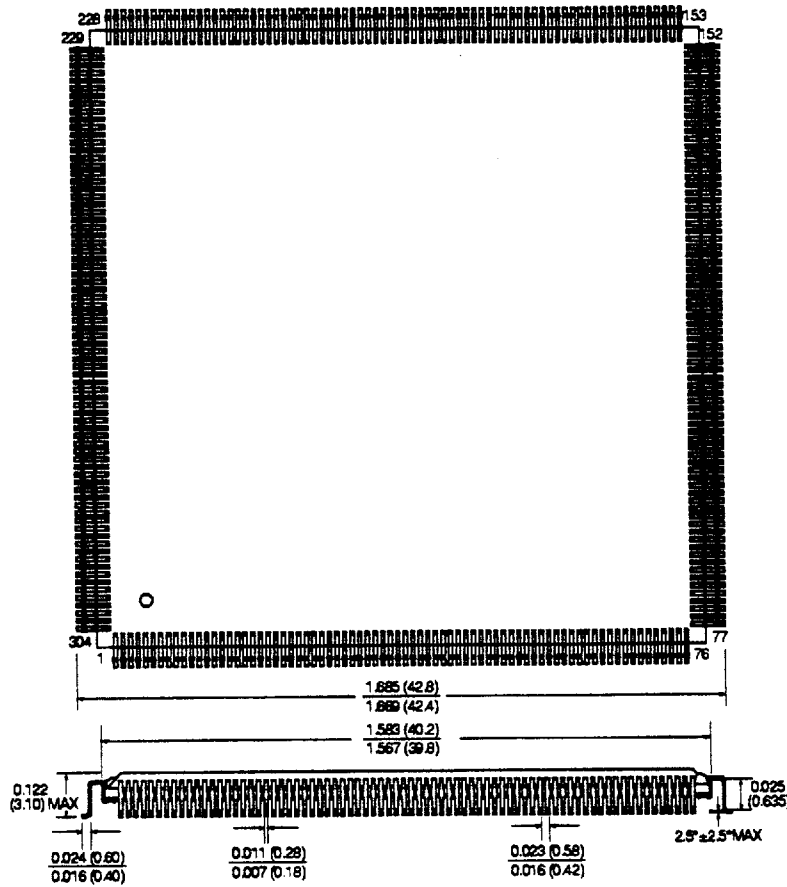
Top View, heat sink not shown. Drawing not to scale in(mm)
